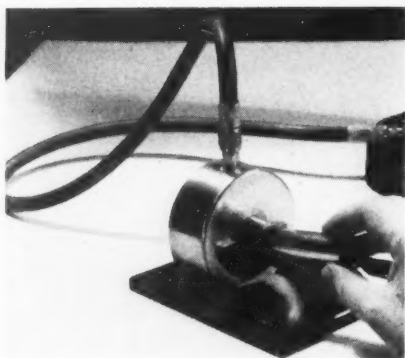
A ring, with air jets inside, may be hooked to an air gage and cylindrical pieces measured in the manner shown here.
